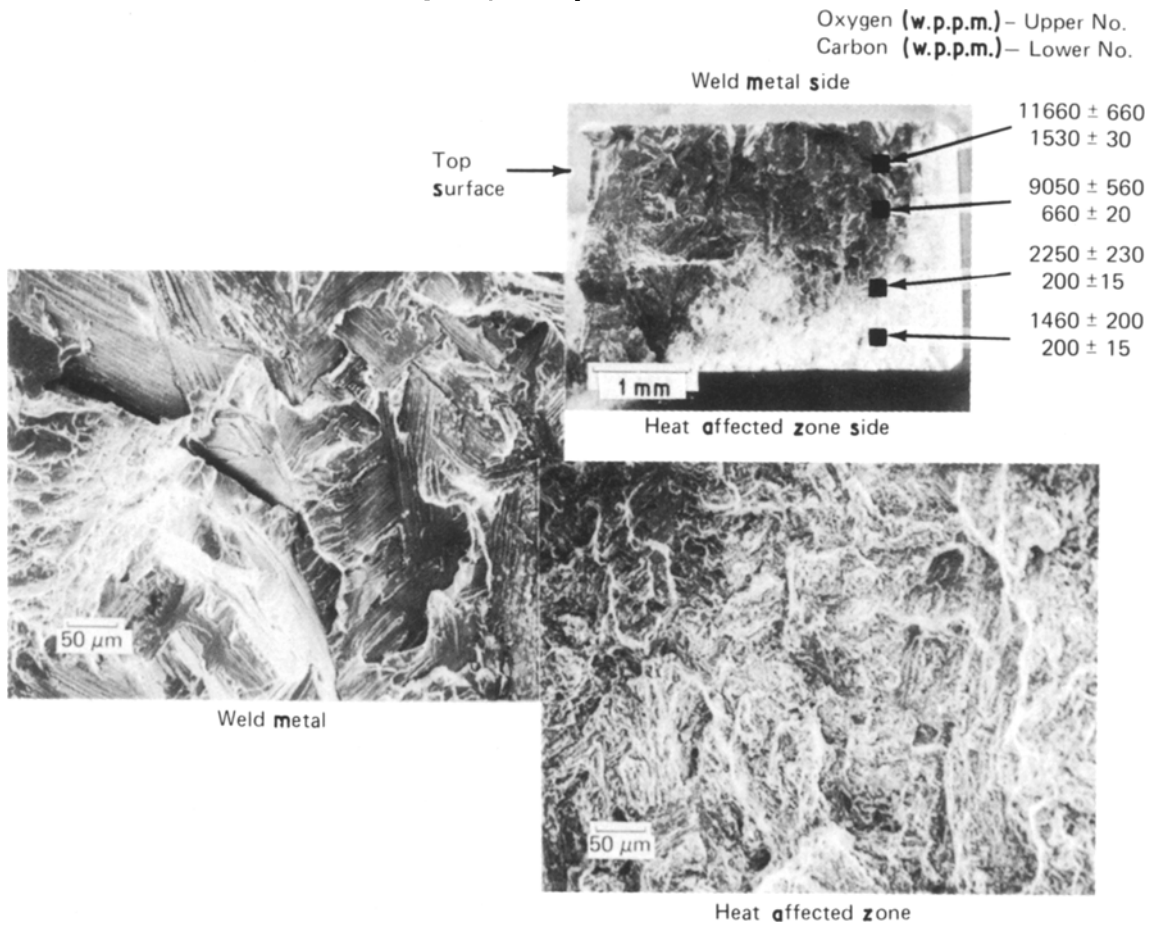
Oxygen/carbon analyses of crack fracture surface – Sample C. SEM fractographs.
